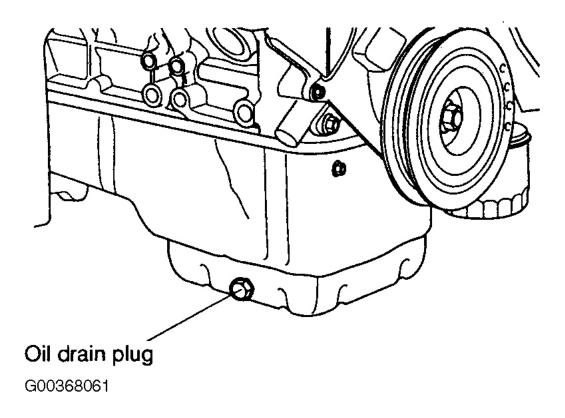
Identifying Oil Drain Plug Courtesy of KIA MOTORS AMERICA, INC.
